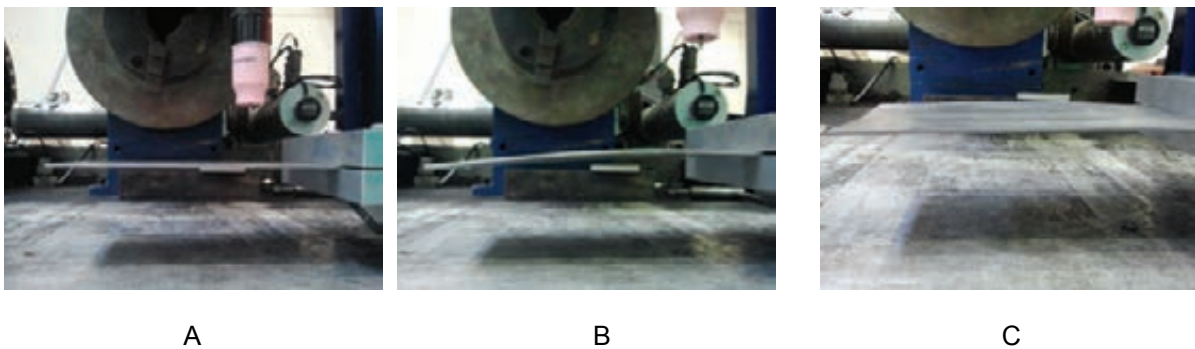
Deformation of the plate before welding A, after welding B and after three times of local heat treatment C.
